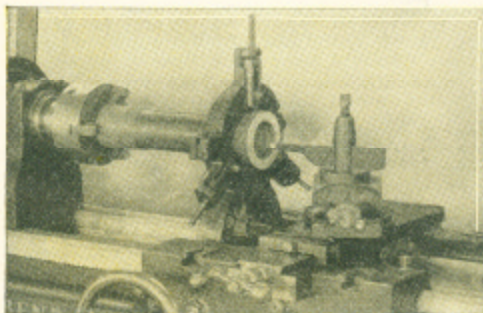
Cutting an Internal Thread in a Large Piece of Work.
